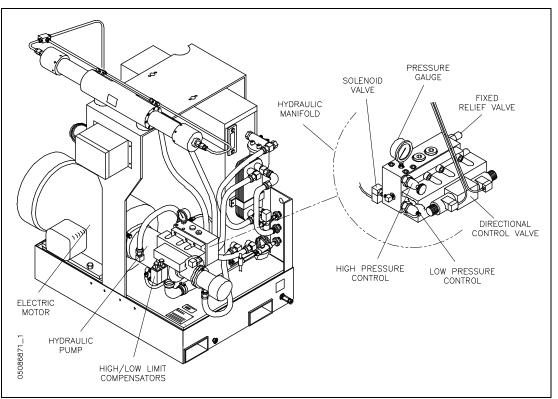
Hydraulic System Components, Redundant Intensifier
